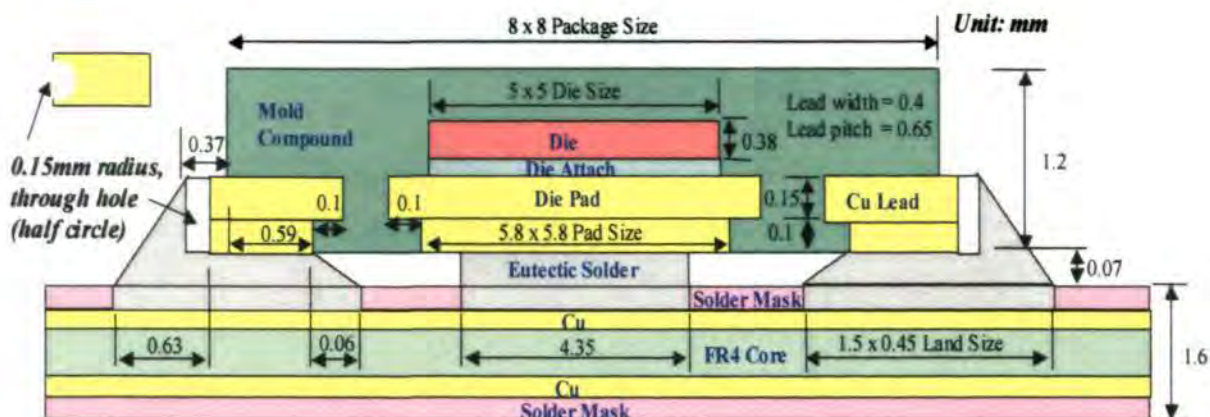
Schematic of PowerQFN-8x8mm package on board
